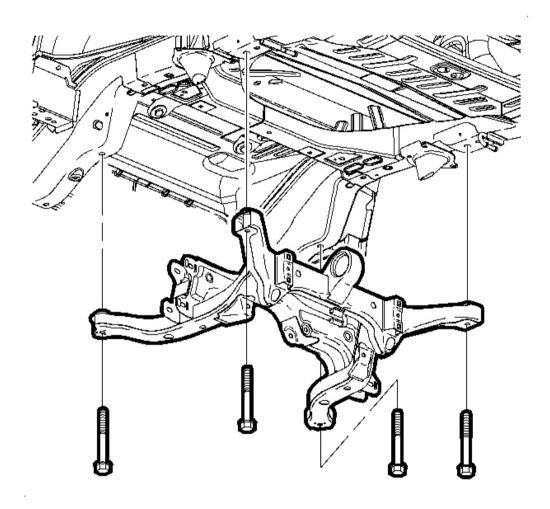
Body Bolts & Support Assembly Courtesy of GENERAL MOTORS CORP.
